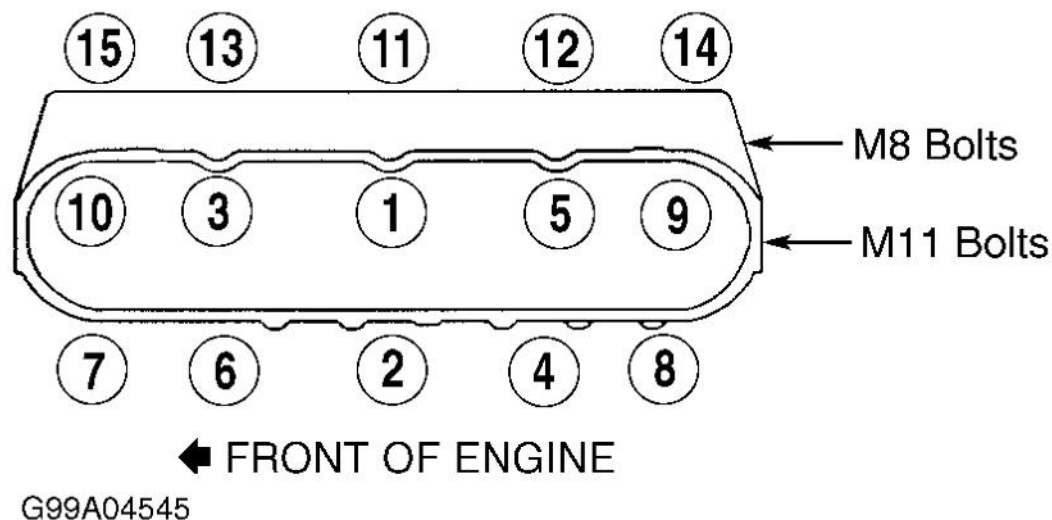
Identifying Cylinder Head Bolt Tightening Sequence
